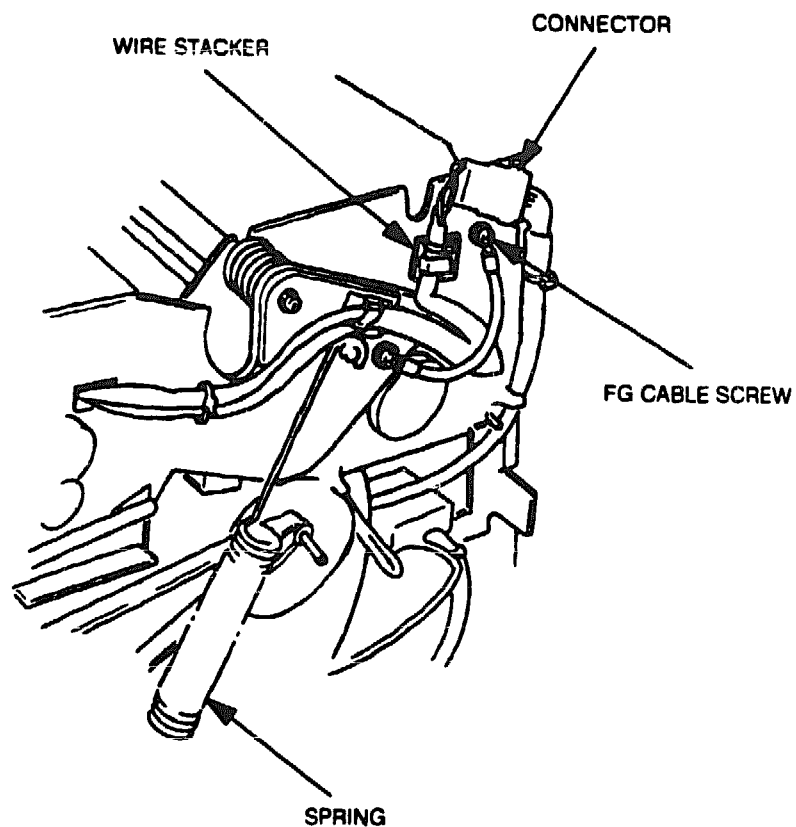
Upper Unit FG Cable, Connector, and Spring
